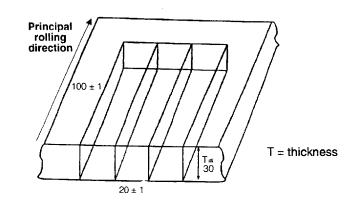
Test specimen location for plates up to 30 mm thick, inclusive (all dimensions in mm)
